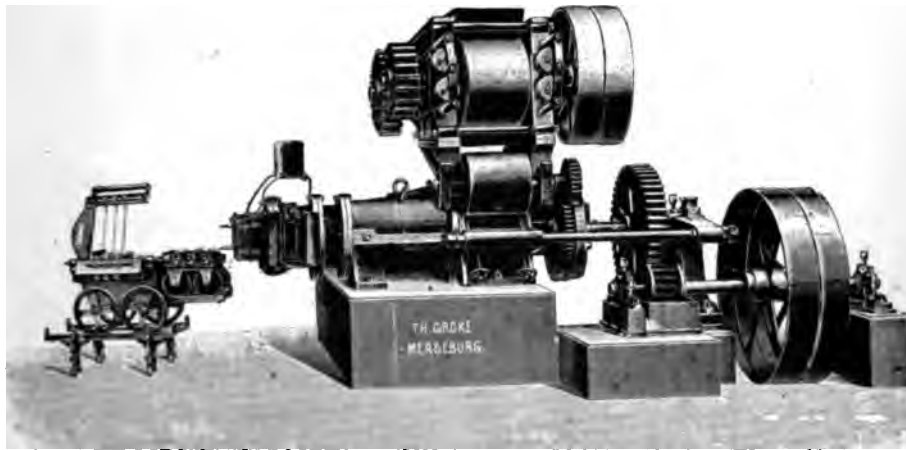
Screw Machine with Rollers and Distributing Cylinders (Groke).
